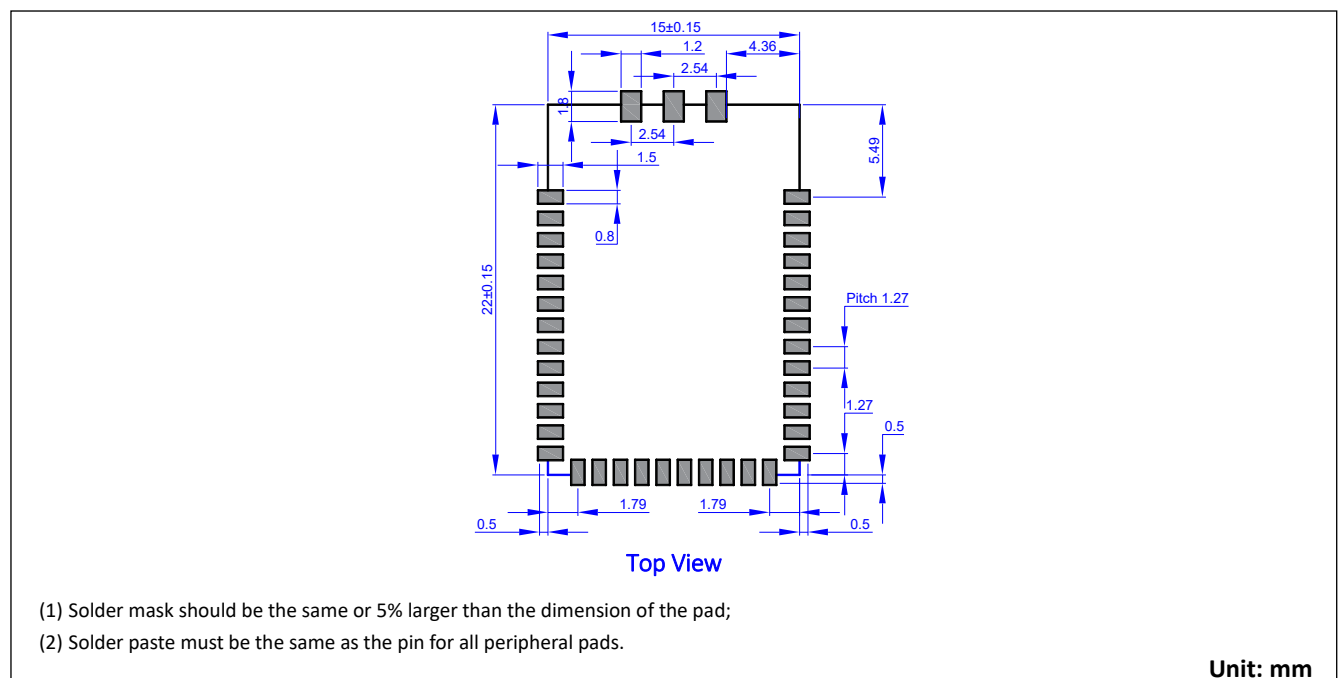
Recommended Module Footprint of BDE-SG1311R3
